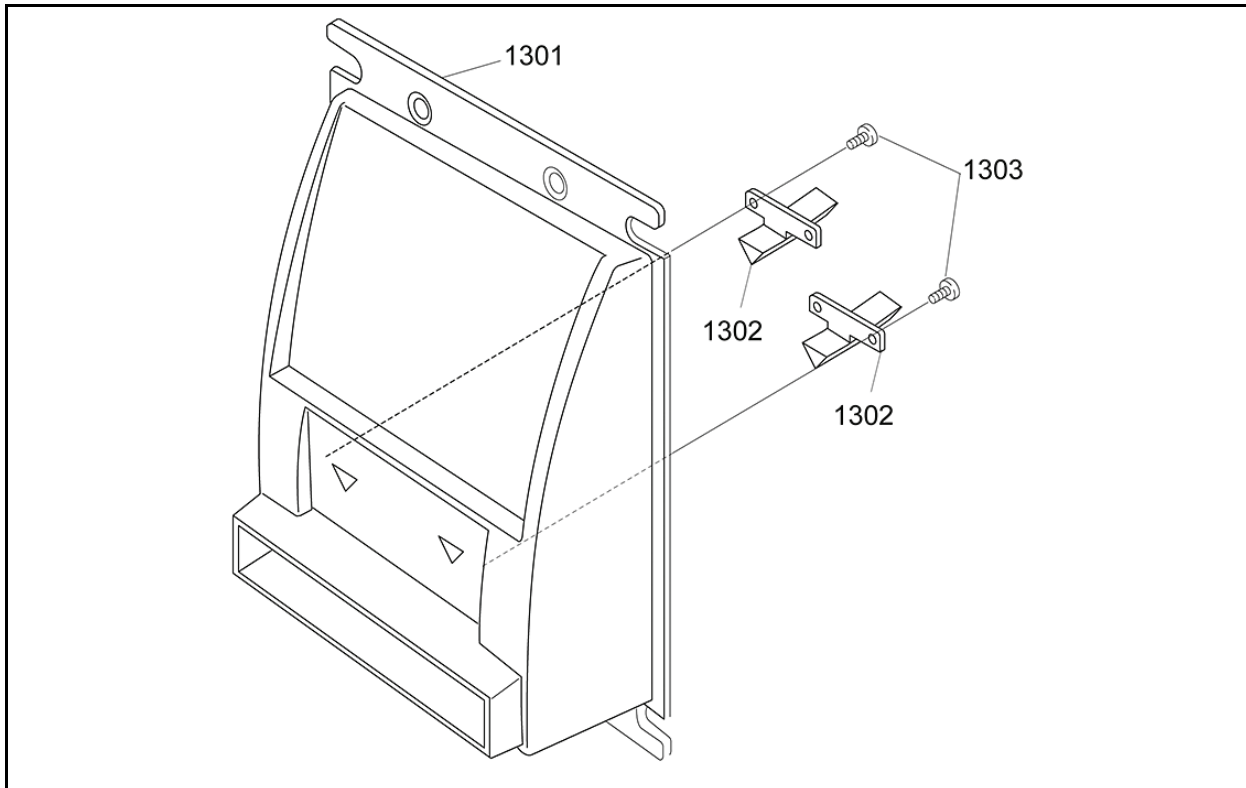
DBV-30X Euro Bezel Kit Assembly Exploded View
